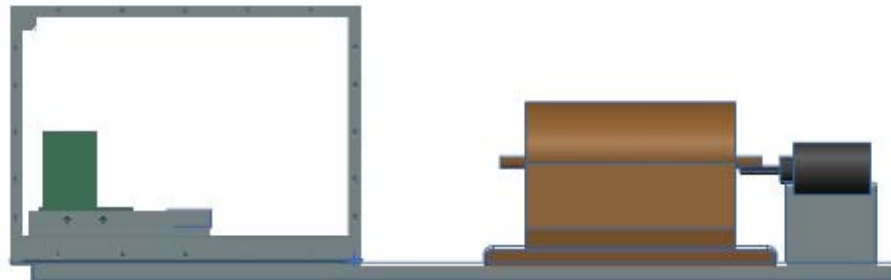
Side view of CAD model showing dynamometer, starter motor, base plate, chamber without inlet and exit diffusers, motor mount, and motor mount adjustment plate.
